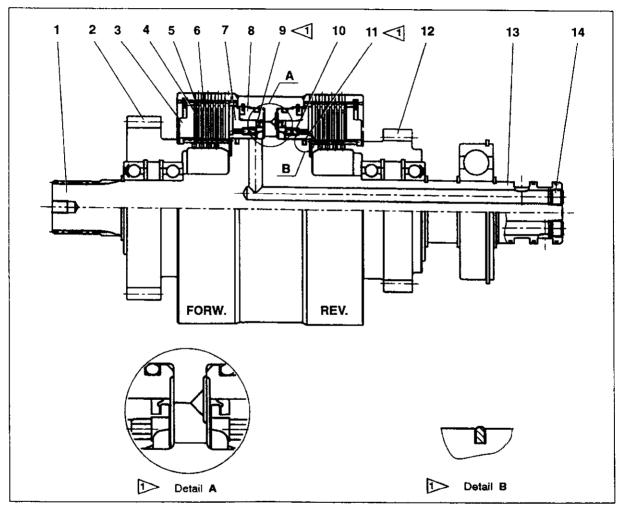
Typical arrangement of the direction clutches shaft on models W110 and W130
